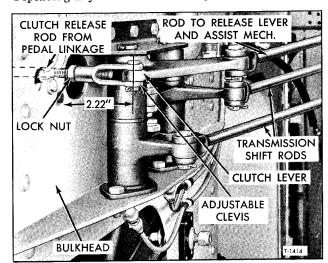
Clutch Bell Crank Lever Position at Bulkhead
